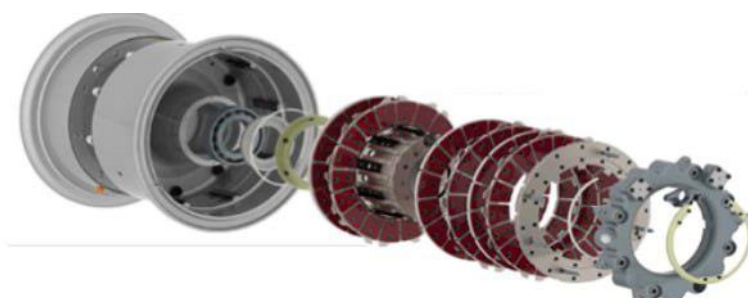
Aircraft Brake Rotor And Stator Assembly
